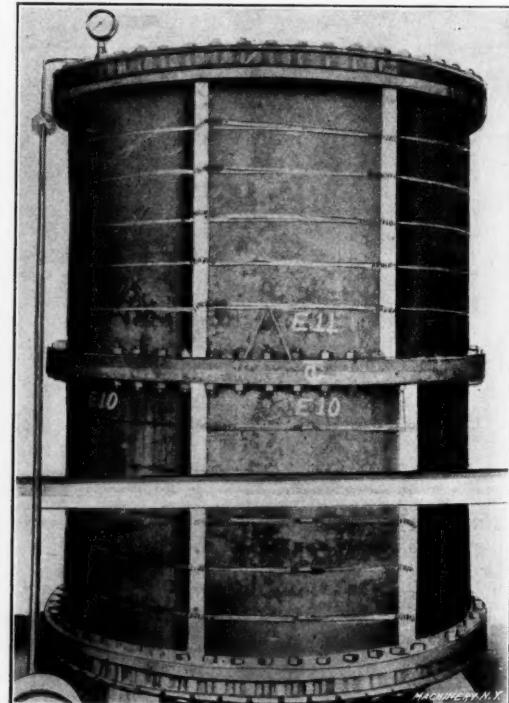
Complete Hydraulic Cylinder made in Two Parts and Tested at a Pressure of 1800 Pounds per Square Inch
